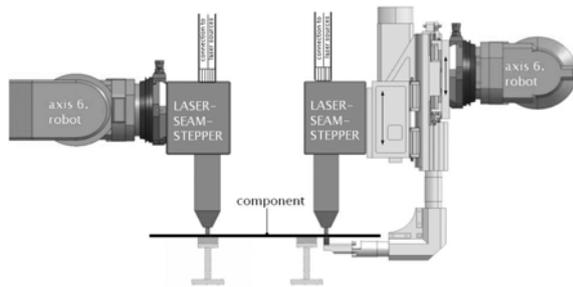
Laser-seam-stepper (left: seam stepper; right: seam stepper C-gun)
